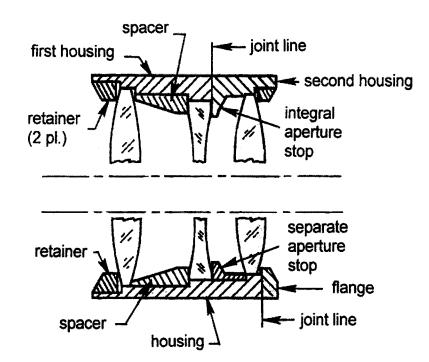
Schematics of two all-plastic, three-lens assemblies with identical optics. The upper design (two axially joined housings) should have a lower cost, but the lower one (one housing and a flange) should have better lens centration. (Courtesy of 3M Precision Optics, Inc., Cincinnati, OH.)
